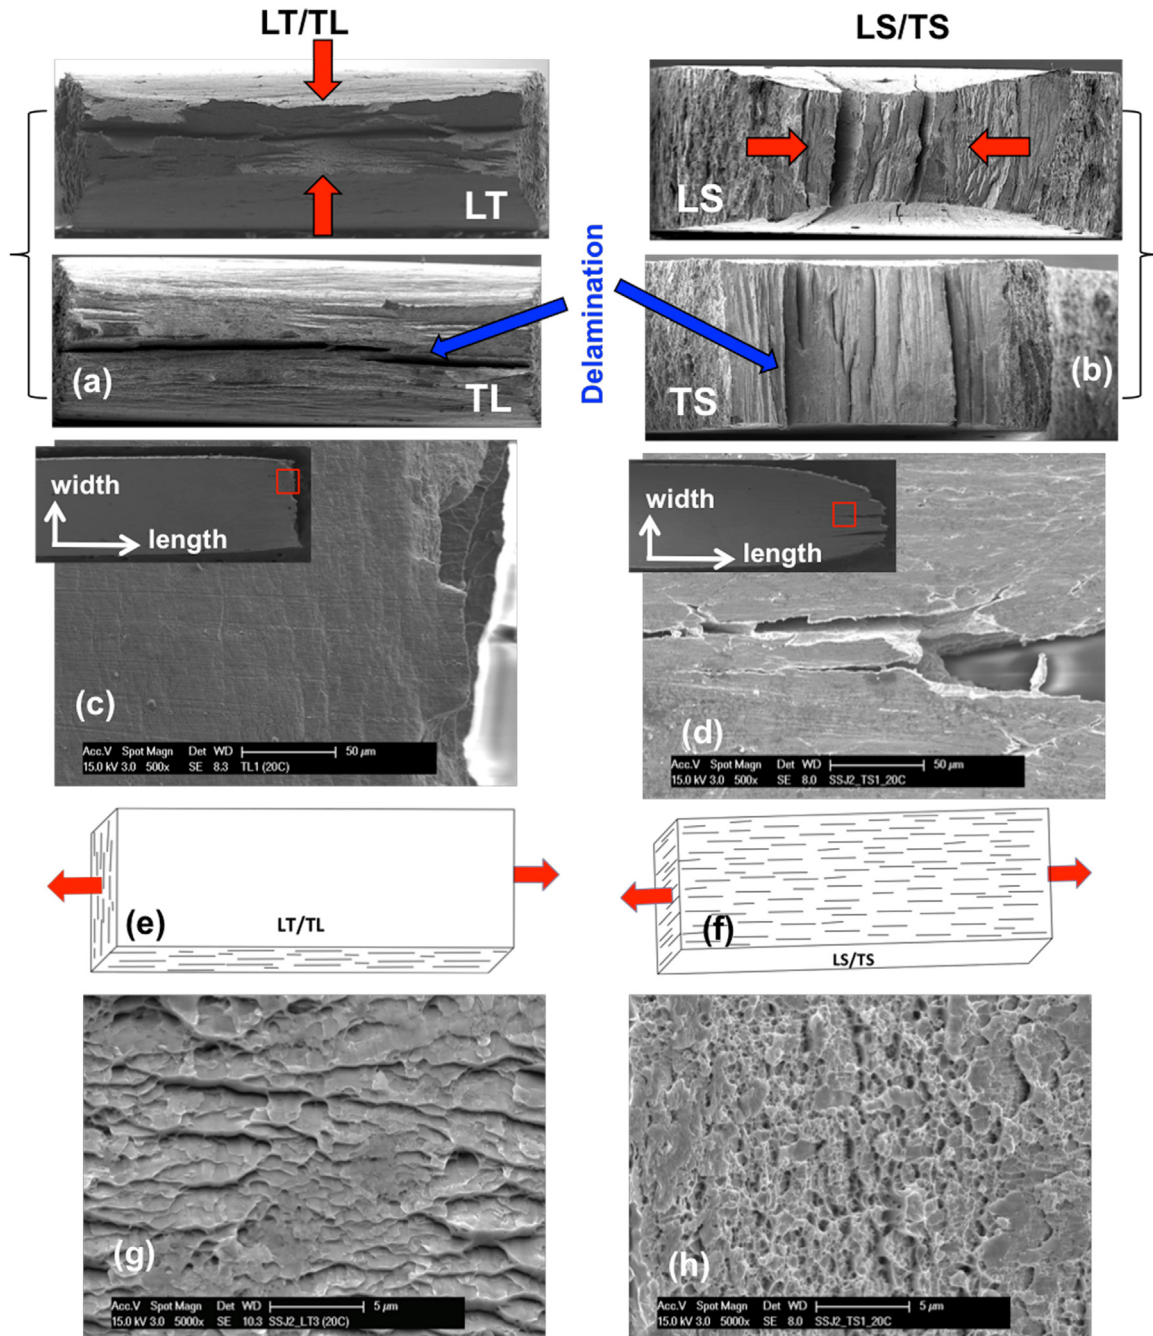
Images of NFA-1 tensile specimens tested at ambient temperature: (a–b) low magnification macro views of a fracture surface; (c–d) macro (insert) and higher magnification views of a tensile specimen side surface, marked by the boxed; (e–f) schematic of the microcracks in the two orientations; and, (g–h) high magnification images of ductile fracture surfaces for LT and TL, as well as LS and TS, orientations. Note that all the inserted macro-views show the length (horizontal direction), and width (vertical direction), as well as the fractured edge, of the tensile specimen.
